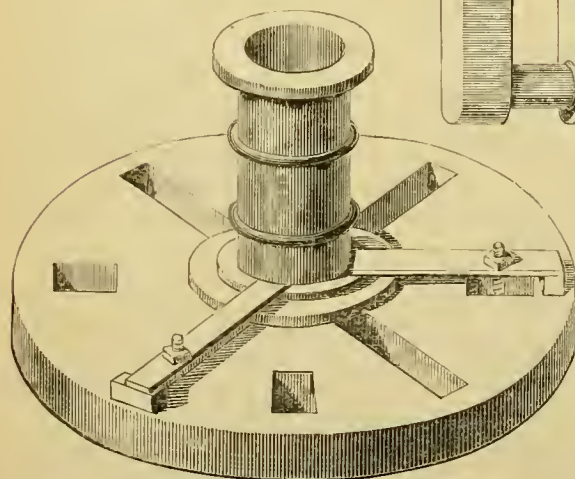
METHOD OF CHUCKING CYLINDER.
